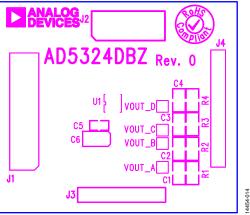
EVAL-AD5324DBZ Daughter Board Component Placement
